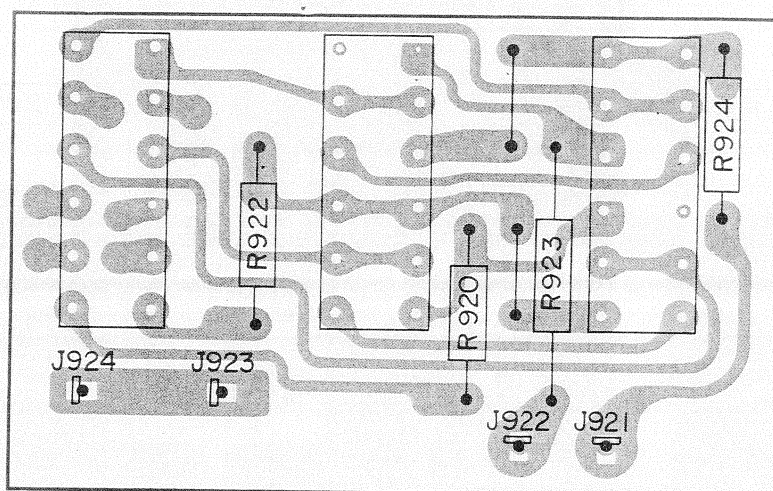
Tape Monitor and Mono in L.R. Switches Unit Assembly P920 Component Locations
